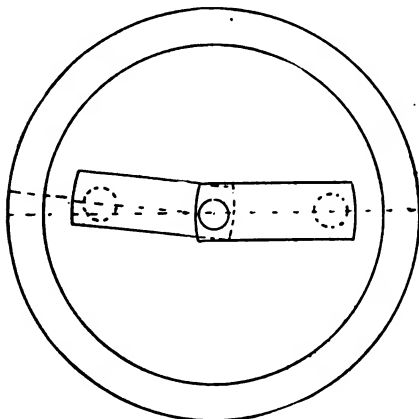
A CRANK SHAFT MAY SPRING IN THIS MANNER
